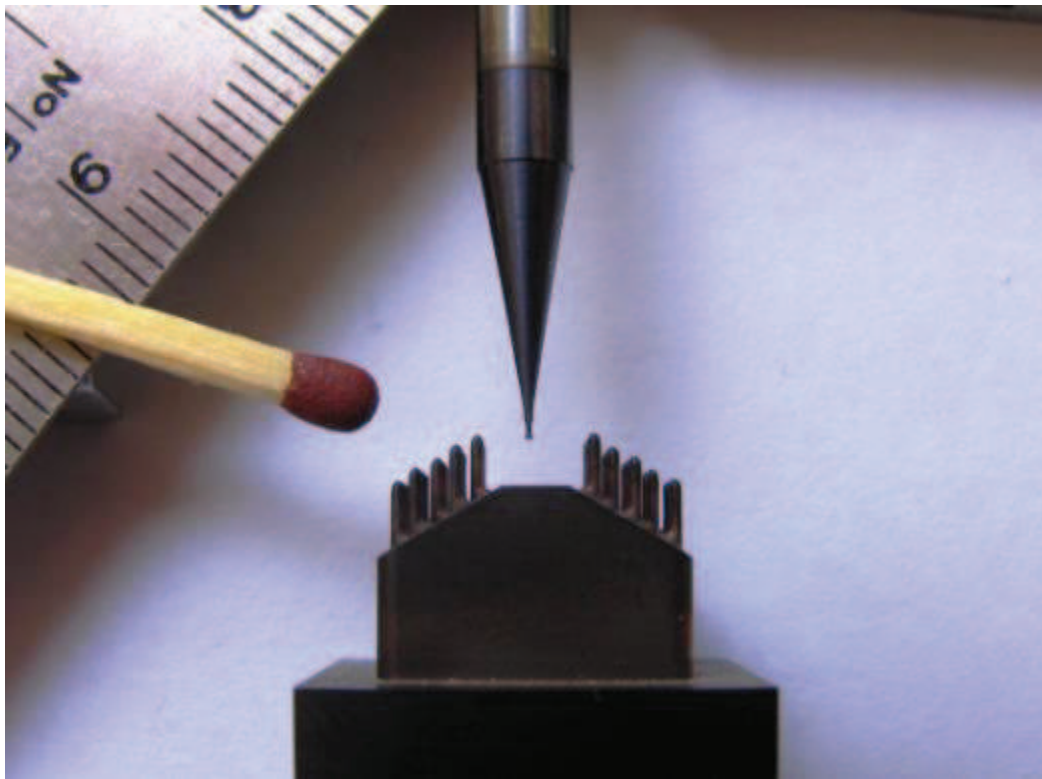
Micro mold machined using micro milling (Mold Making Technology).
